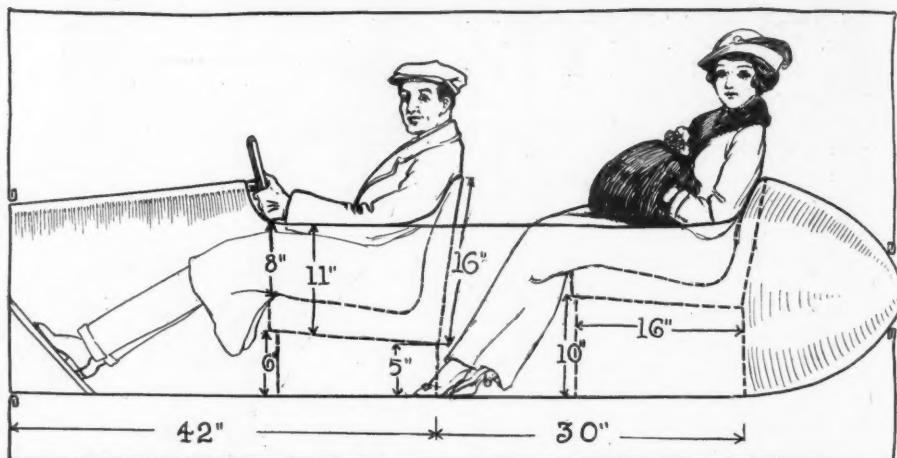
SEATING DIMENSIONS FOR TANDEM-TYPE CAR AS SUGGESTED
